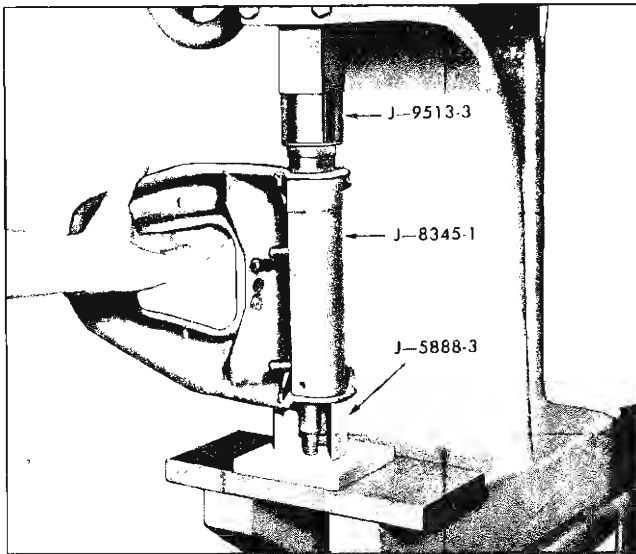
Installing Pivot Shaft Bushing—Chevy II
